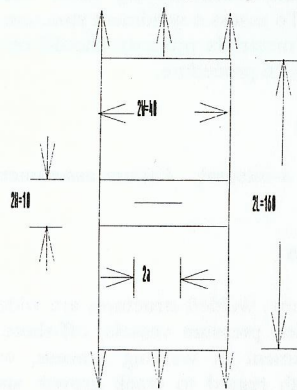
Dimensions of the tensile panels containing transfer mis-matched welds
